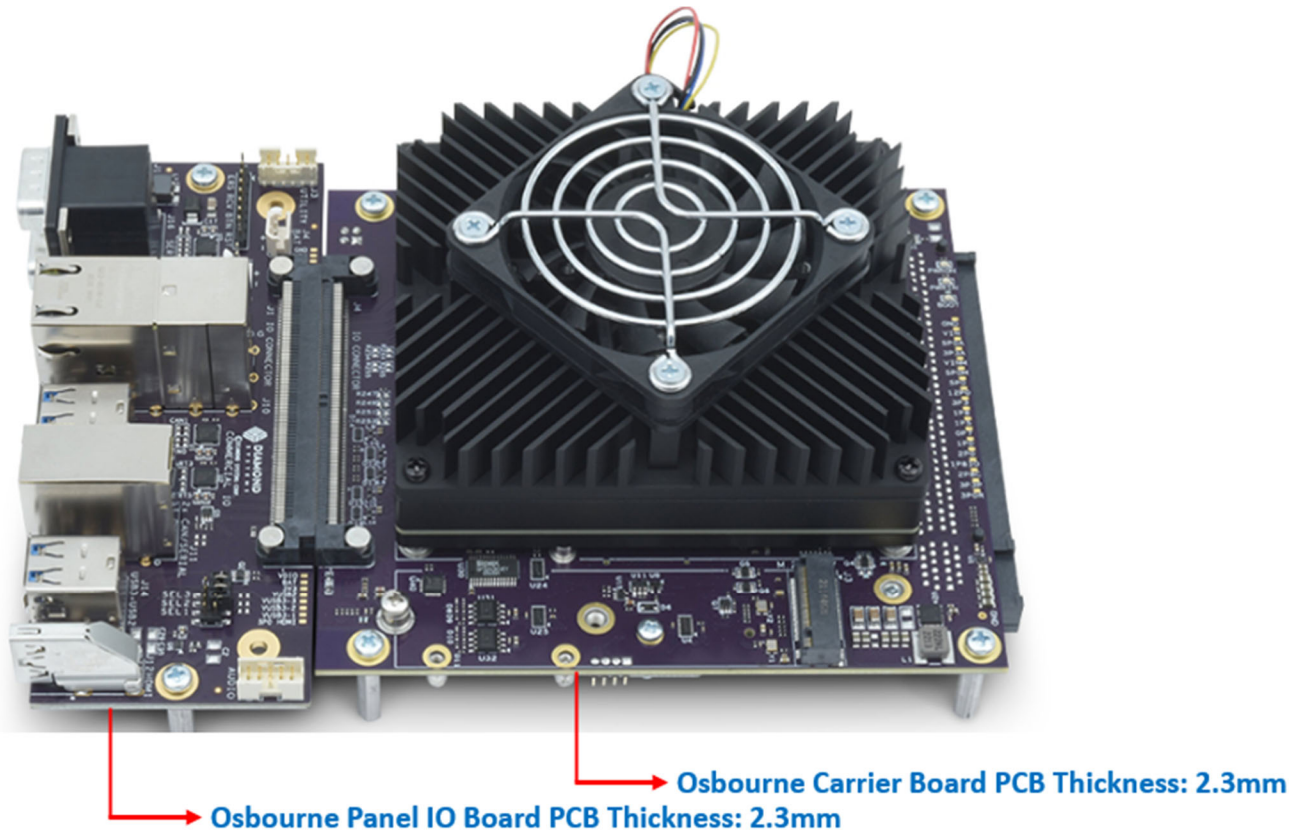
Osbourne Carrier Board with Osbourne Panel IO Board with PCB thickness for reference
